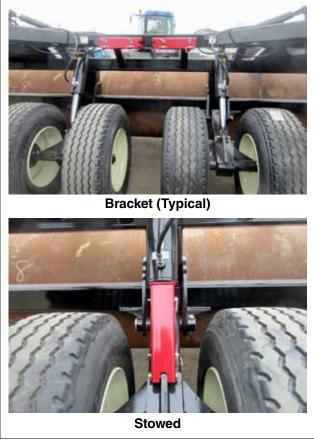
CENTER ROLLER WHEEL ASSEMBLY
